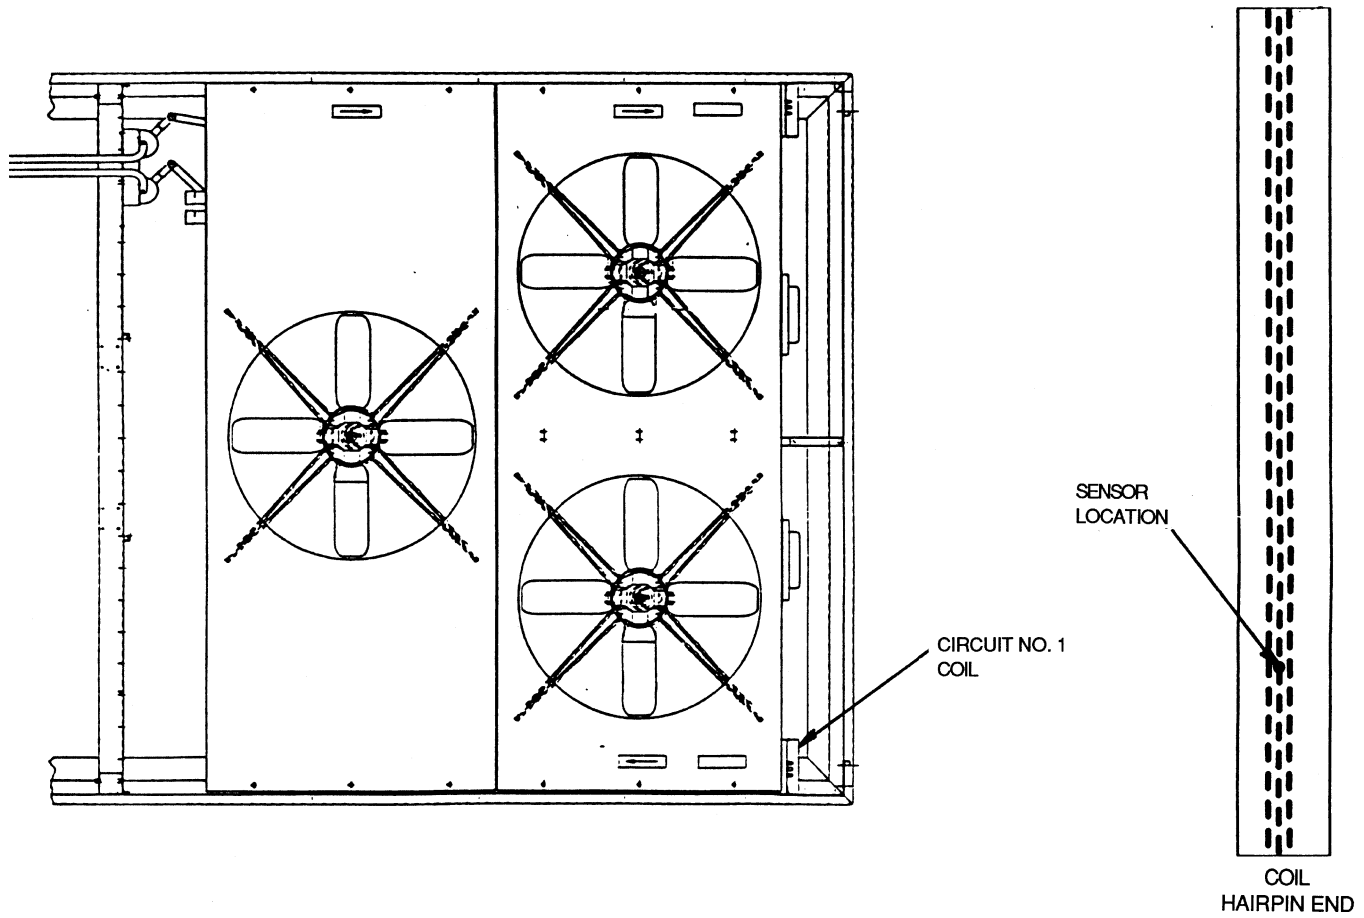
Motormaster® I Control Sensor Location, Size 040,044,048, and 050 Units
